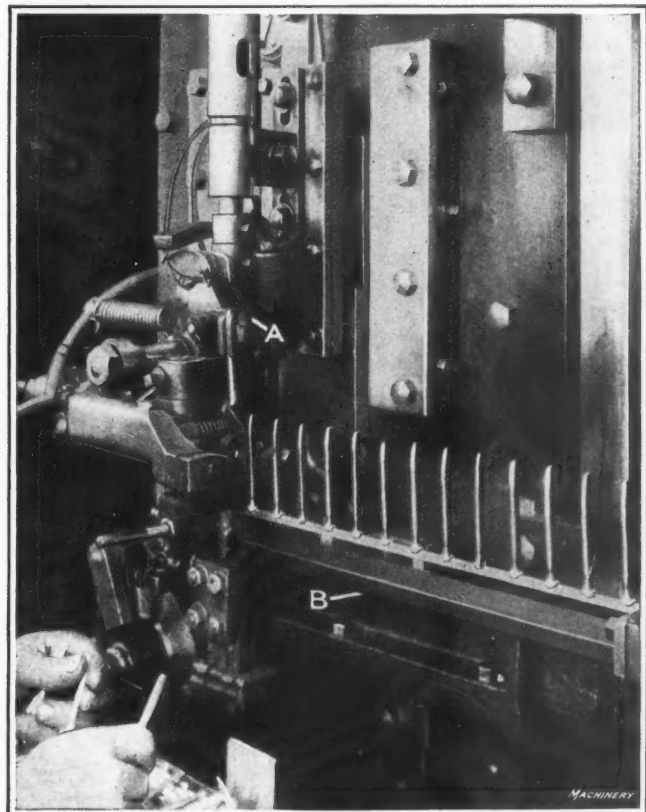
Semi-automatic Machine built by the National Electric Welder Co. for welding Garden Rakes
